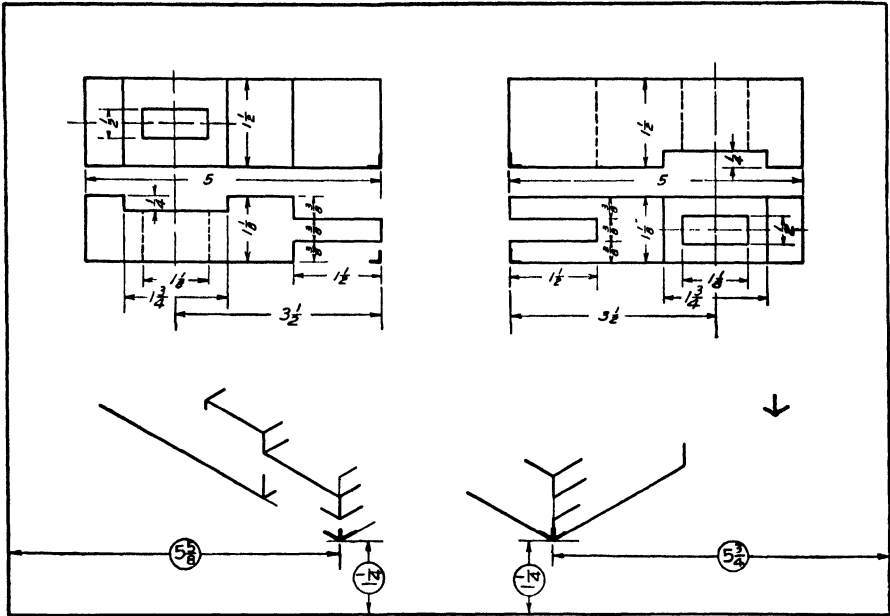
Isometric drawing. Probs. 336 and 337.
